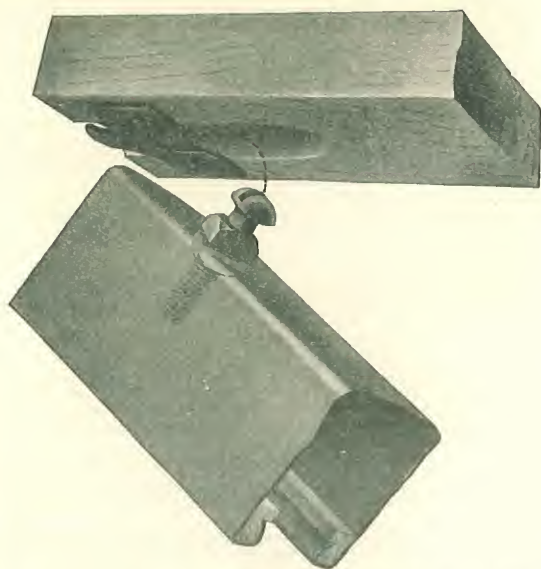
Fig. B. Close View Showing Slotted Plate and Adjusting Screw.
